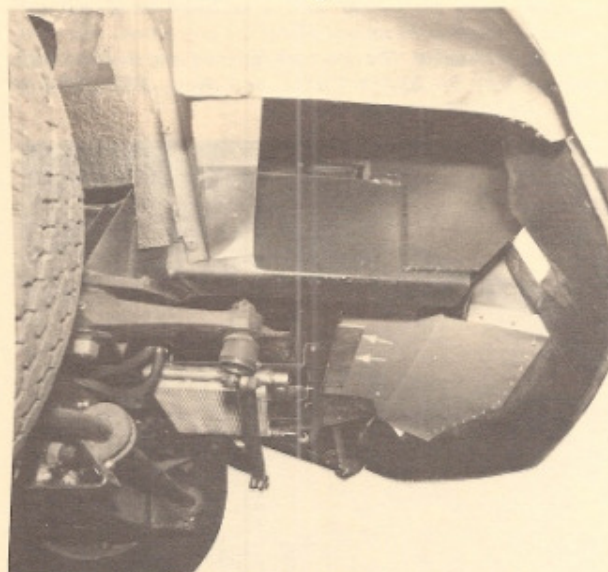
Main Front Body Panel Removal: The body panel is fastened at the two uprights at the upper structure, 6 rivets on the face of the panel. There also are approximately 26 rivets that fasten the panel at the interface of the left and right fenders. Silopreme sealant also is used to secure these body panels together with the aid of the rivets. Care must be taken when separating the body panels so as not to crack the fiberglass. A large flat blade screwdriver or putty knife will be necessary to pry these parts apart. Rivet size and type – AD66 BS pop rivet, .126-.250 grip length, .192-.196 hole diameter. During assembly, 3/16" bolts may be used to fasten the flanges together. Large diameter flat washers should be used with the bolts.
